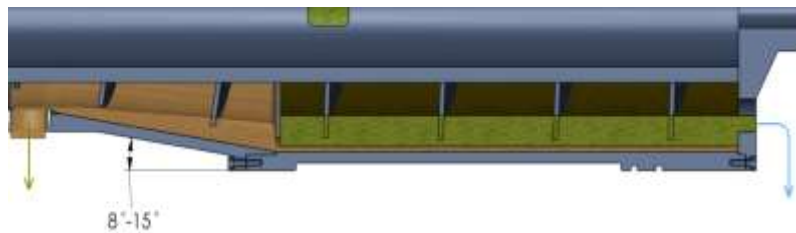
A quarter-section of a Sharples (company no longer in existence) thickening centrifuge rotating assembly. This design implemented a baffle disc on the solids end of the machine, the first of its kind. In addition, this device used a steeper cone angle than had ever before been implemented. Image courtesy of Centrisys Corporation, Kenosha, WI
